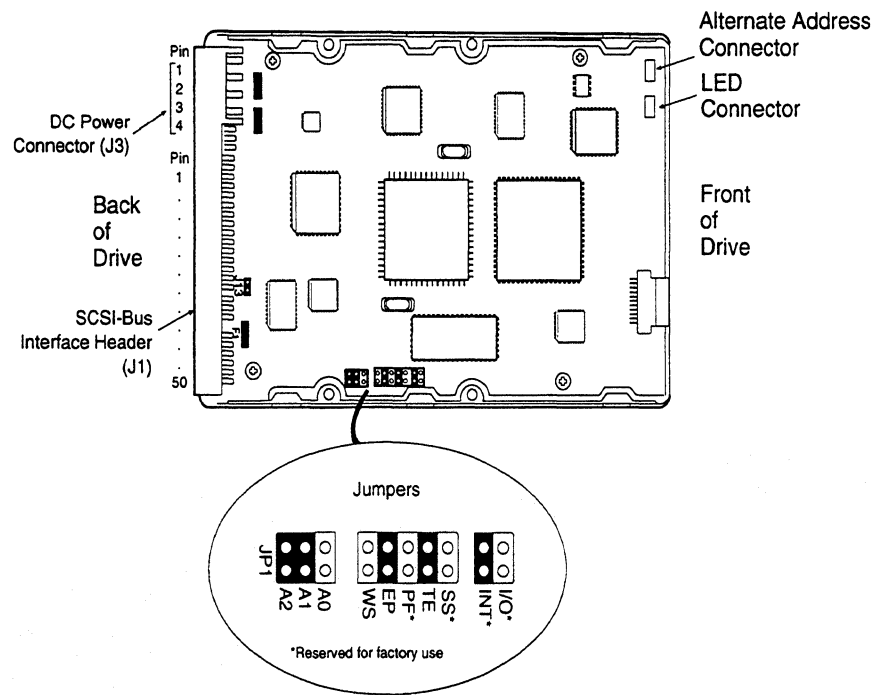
Jumper Pin and Terminator Locations on the Drive PCBA
